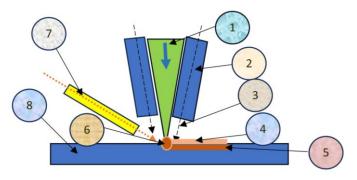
Laser beam and side-injected powder deposition (1- laser beam, 2optical focusing module, 3- coaxially supplied protection gas, 4- de-posited material, 5- thermal influence zone, 6- molten metal bath, 7- addition material and carrier gas, 8- basic material).
